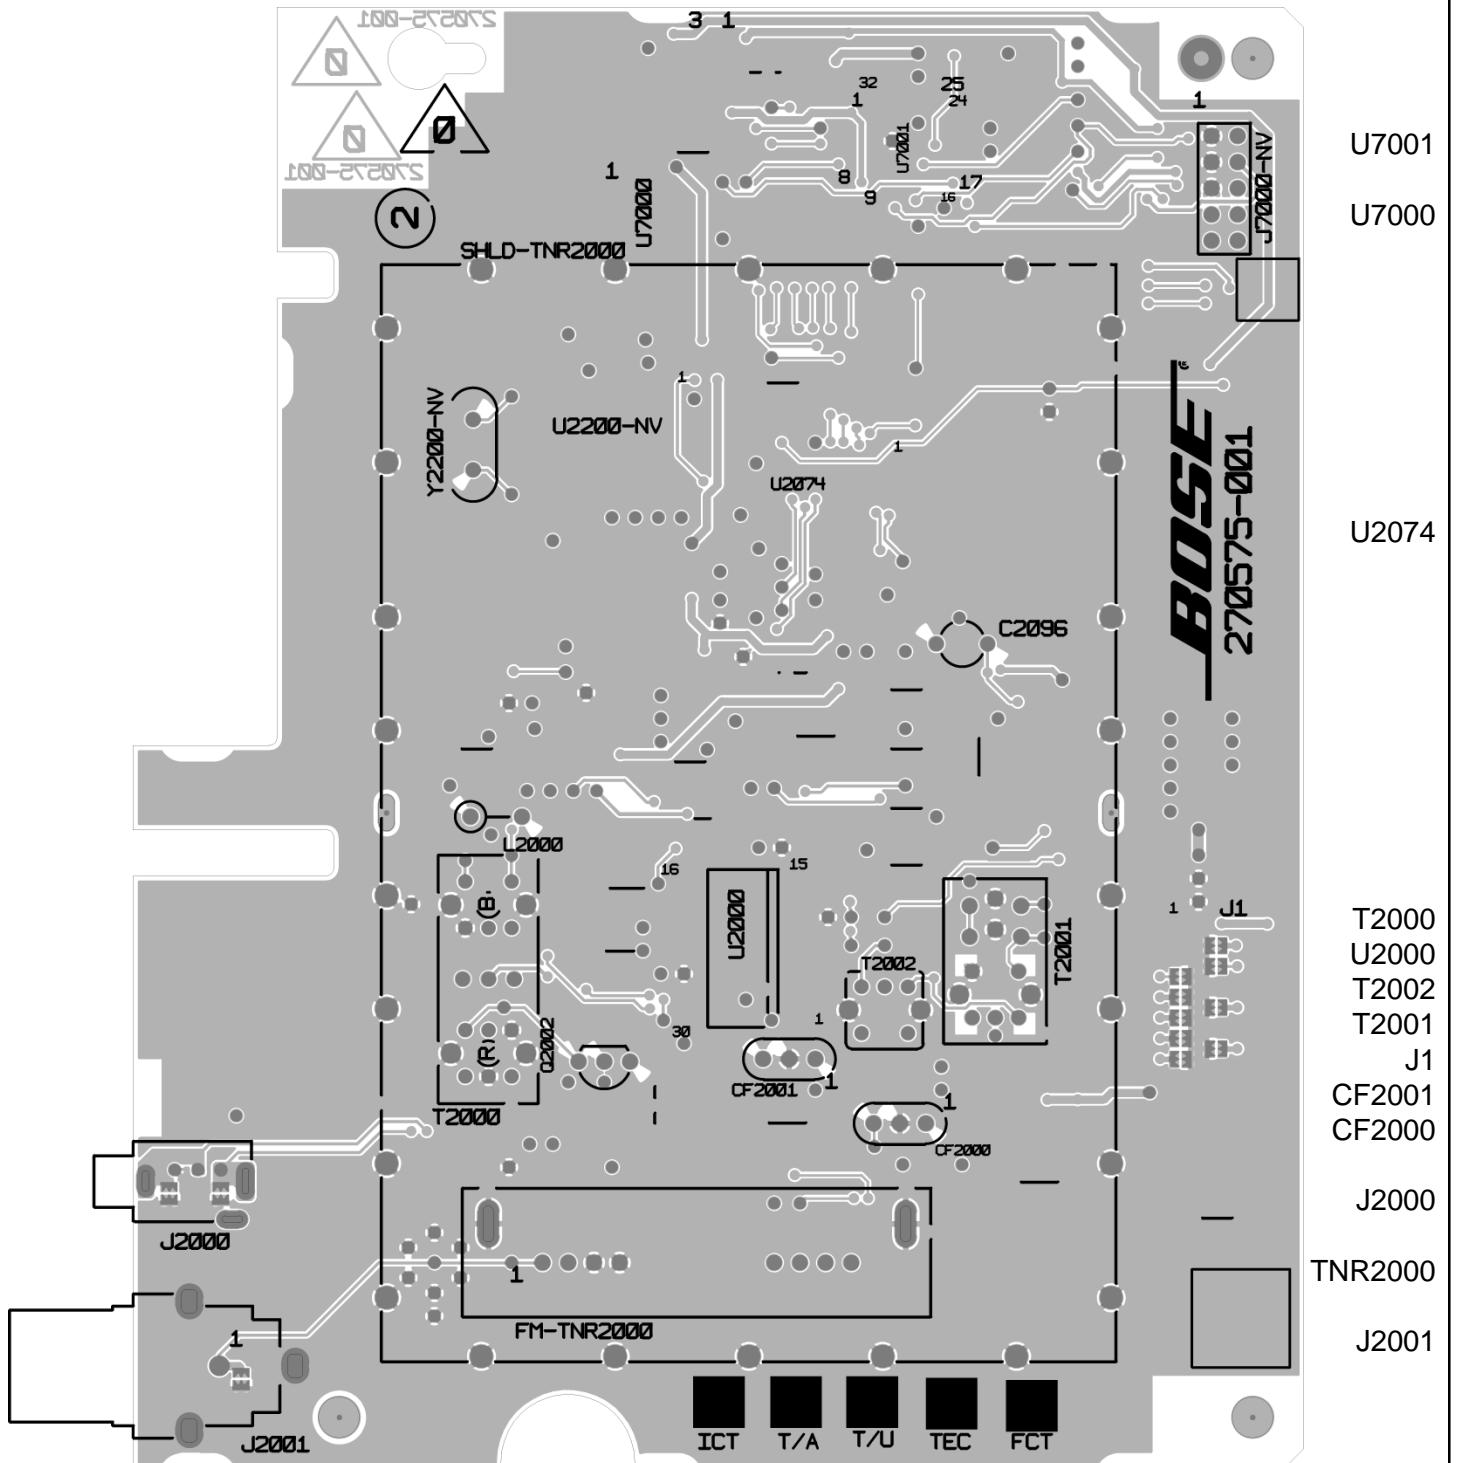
Console Tuner PCB Bottom Side Etch Layout Diagram
